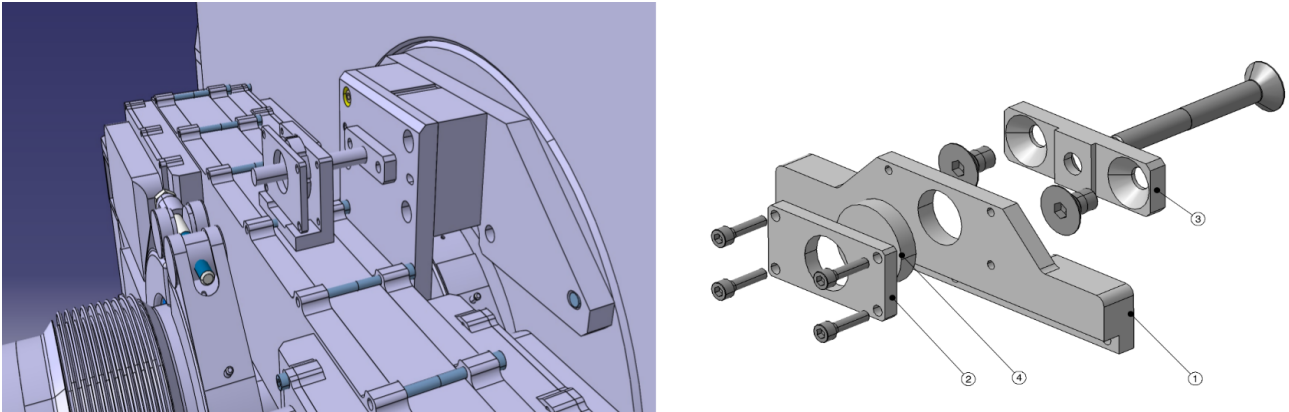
Assembly of the top support to TCX (left pane). CAD drawing of the top support (right pane): (1) pivot bracket attached to the Veto Counter assembly, (2) pivot cylinder support and lock, (3) bracket to TCX mounting holes, (4) cylindrical pivot. [13]
